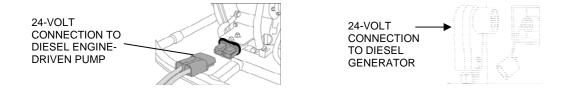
24-Volt Cable Connection to the Diesel Engine-Driven Pump Skid.
